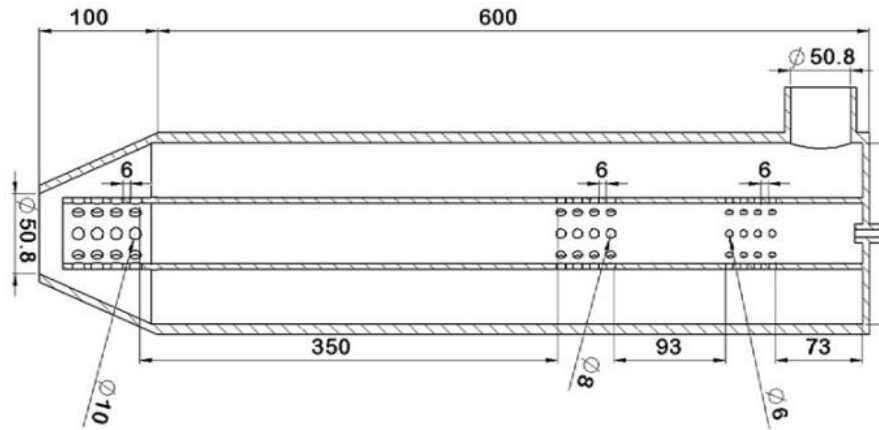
Combustion chamber drawing based on the MGT GarrettGT25 [5].
